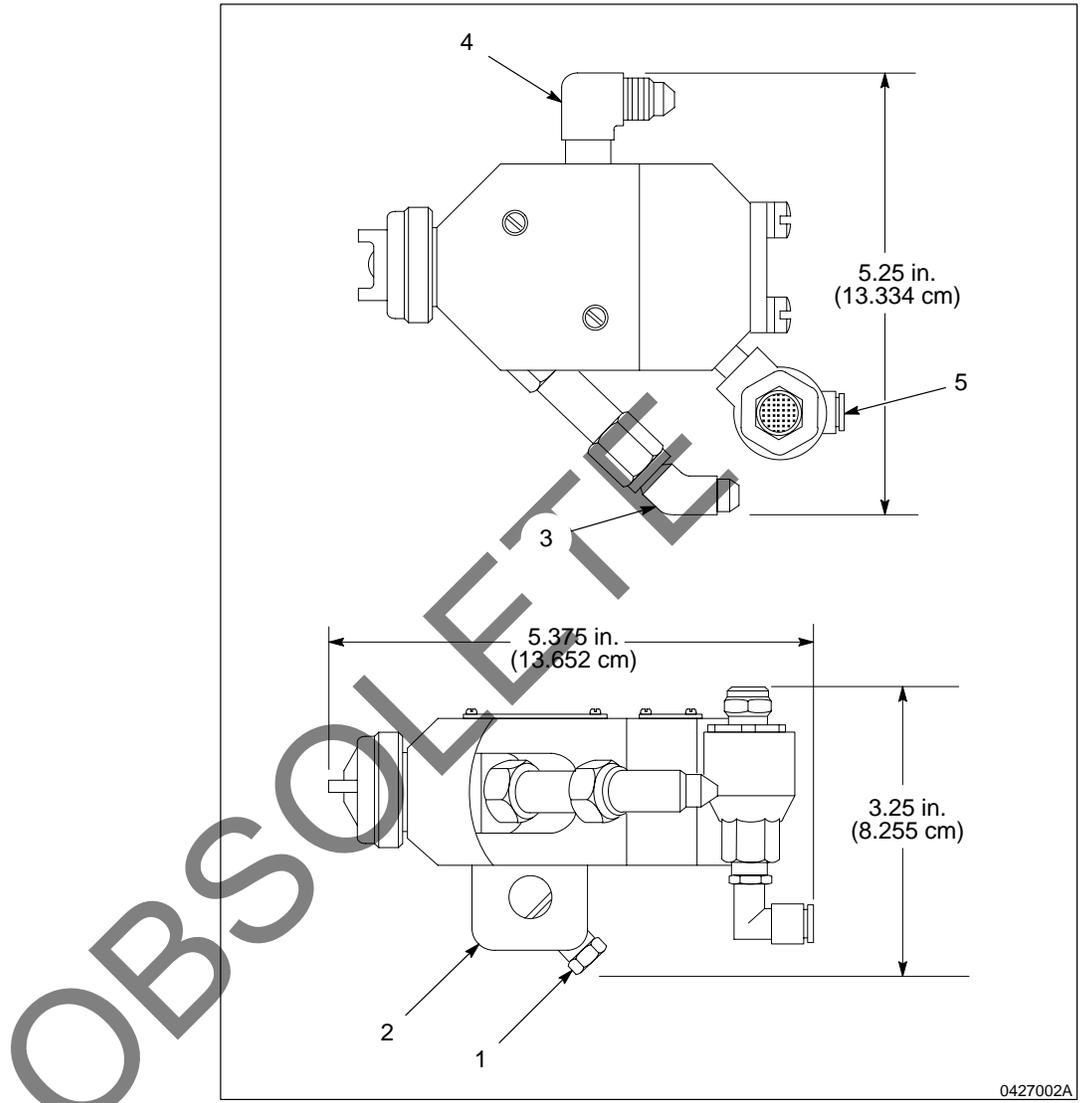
Mounting the SCF-A1 Automatic Spray Gun
